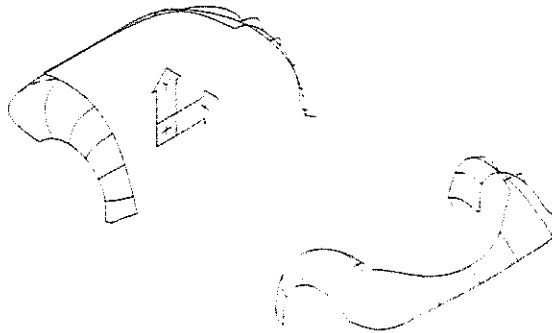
Side surface hidden, front and rear surfaces unhidden, and UCS set
